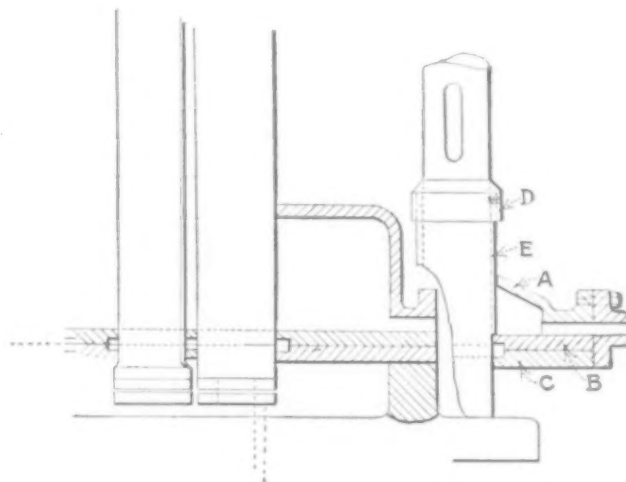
CHIP-PROTECTION DEVICE USED ON INVERTED HEAD OF THE FOOTE-BURT MULTIPLE-WAY DRILLING MACHINE
